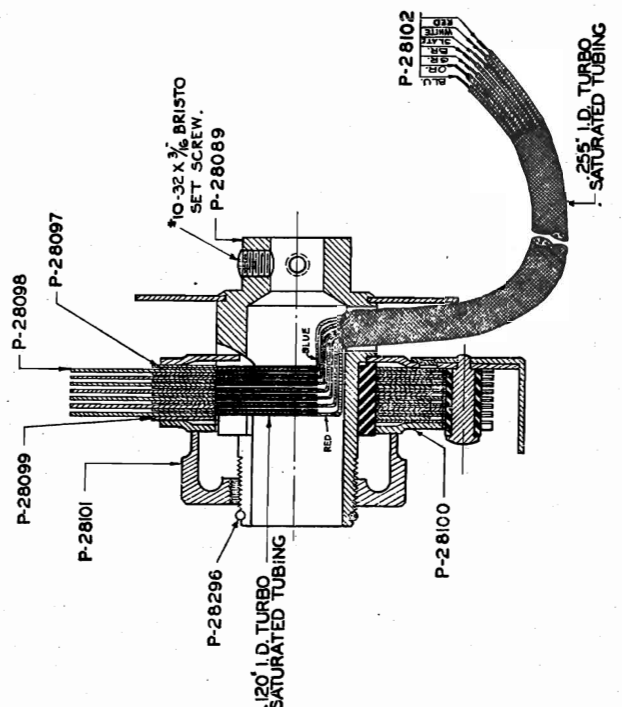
Section View of Flash Tuner Contactors Assembly.
